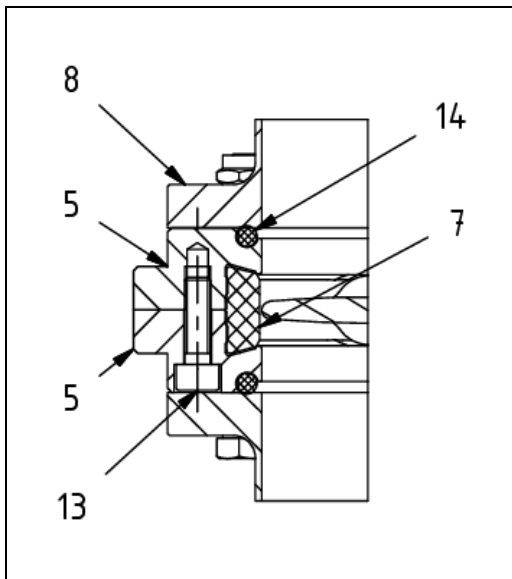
Screw Fitting of the Inner Flange (1)
